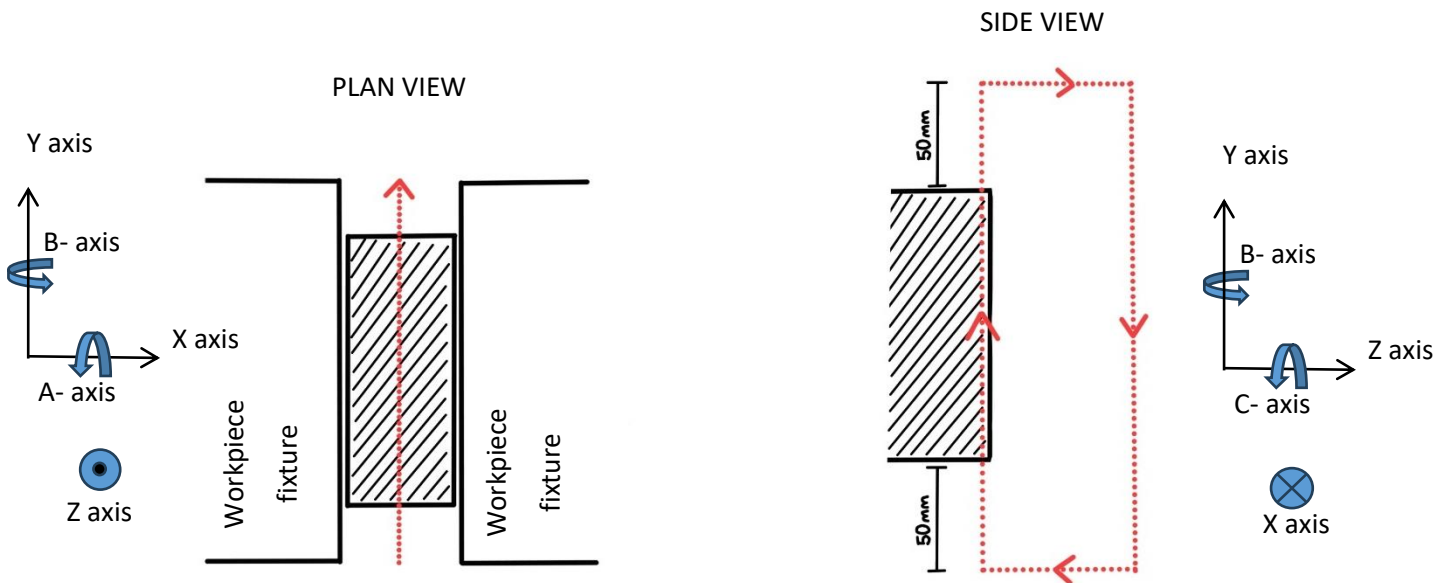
Drawing illustrating the plan view and side view of the workpiece coupon as it is subjected to the down grind tool path during the grinding cycles. Sketch shows the coordinate system used to represent the motion while grinding with respect to the machine
